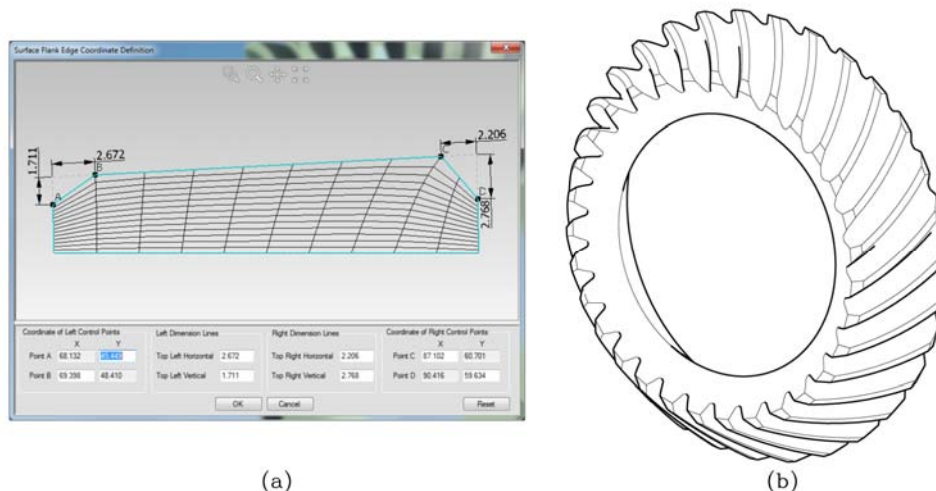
Flank edge coordinates definition: (a) definition window; (b) geometric model of a spiral bevel gear with flank edge coordinates applied.
